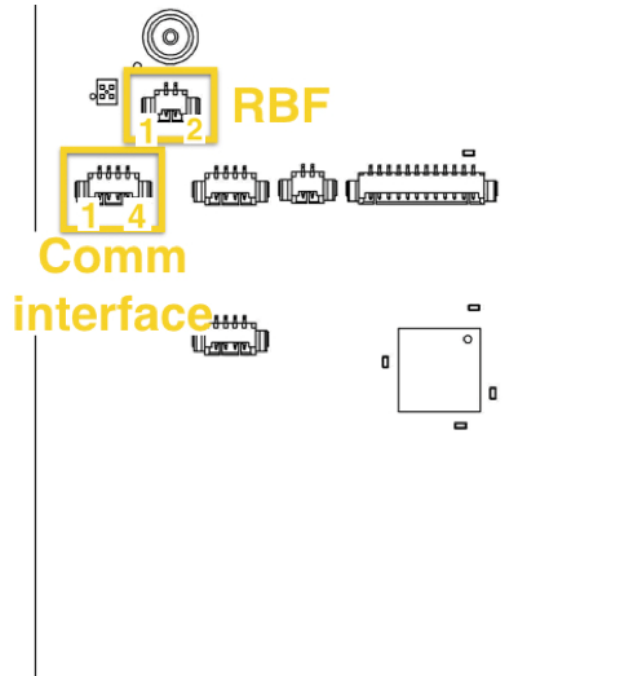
Remove Before Flight (RBF) Connector and Pinout – Bottom Side
